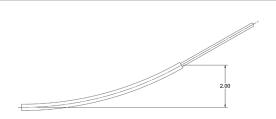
RECOMMENDED RIGID PROBE SHAFT BENDING
